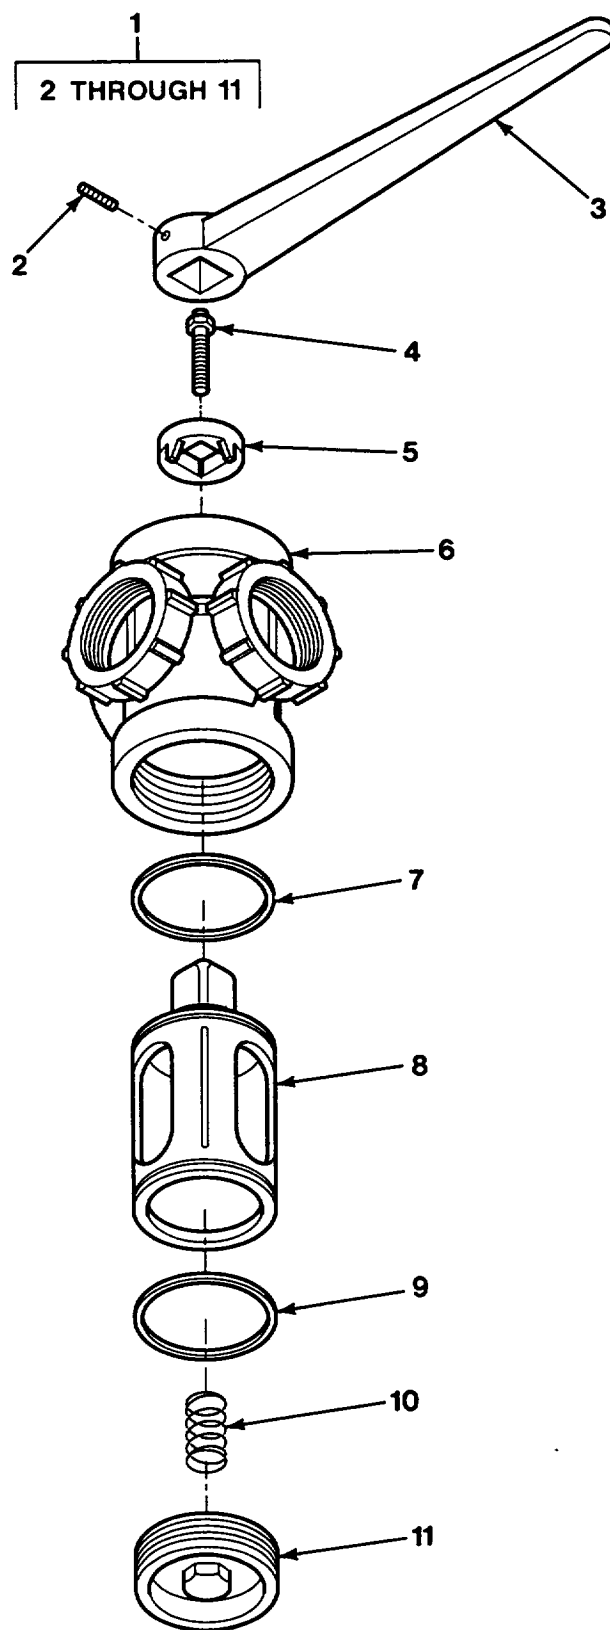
THREE INCH THREE WAY VALVE ASSEMBLY
